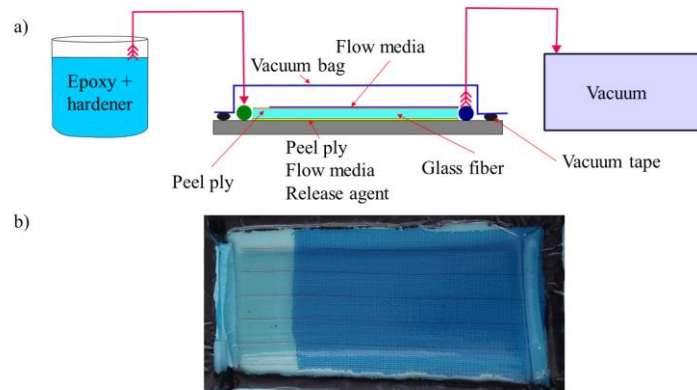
a) Diagram of vacuum infusion process, b) top view of sample
